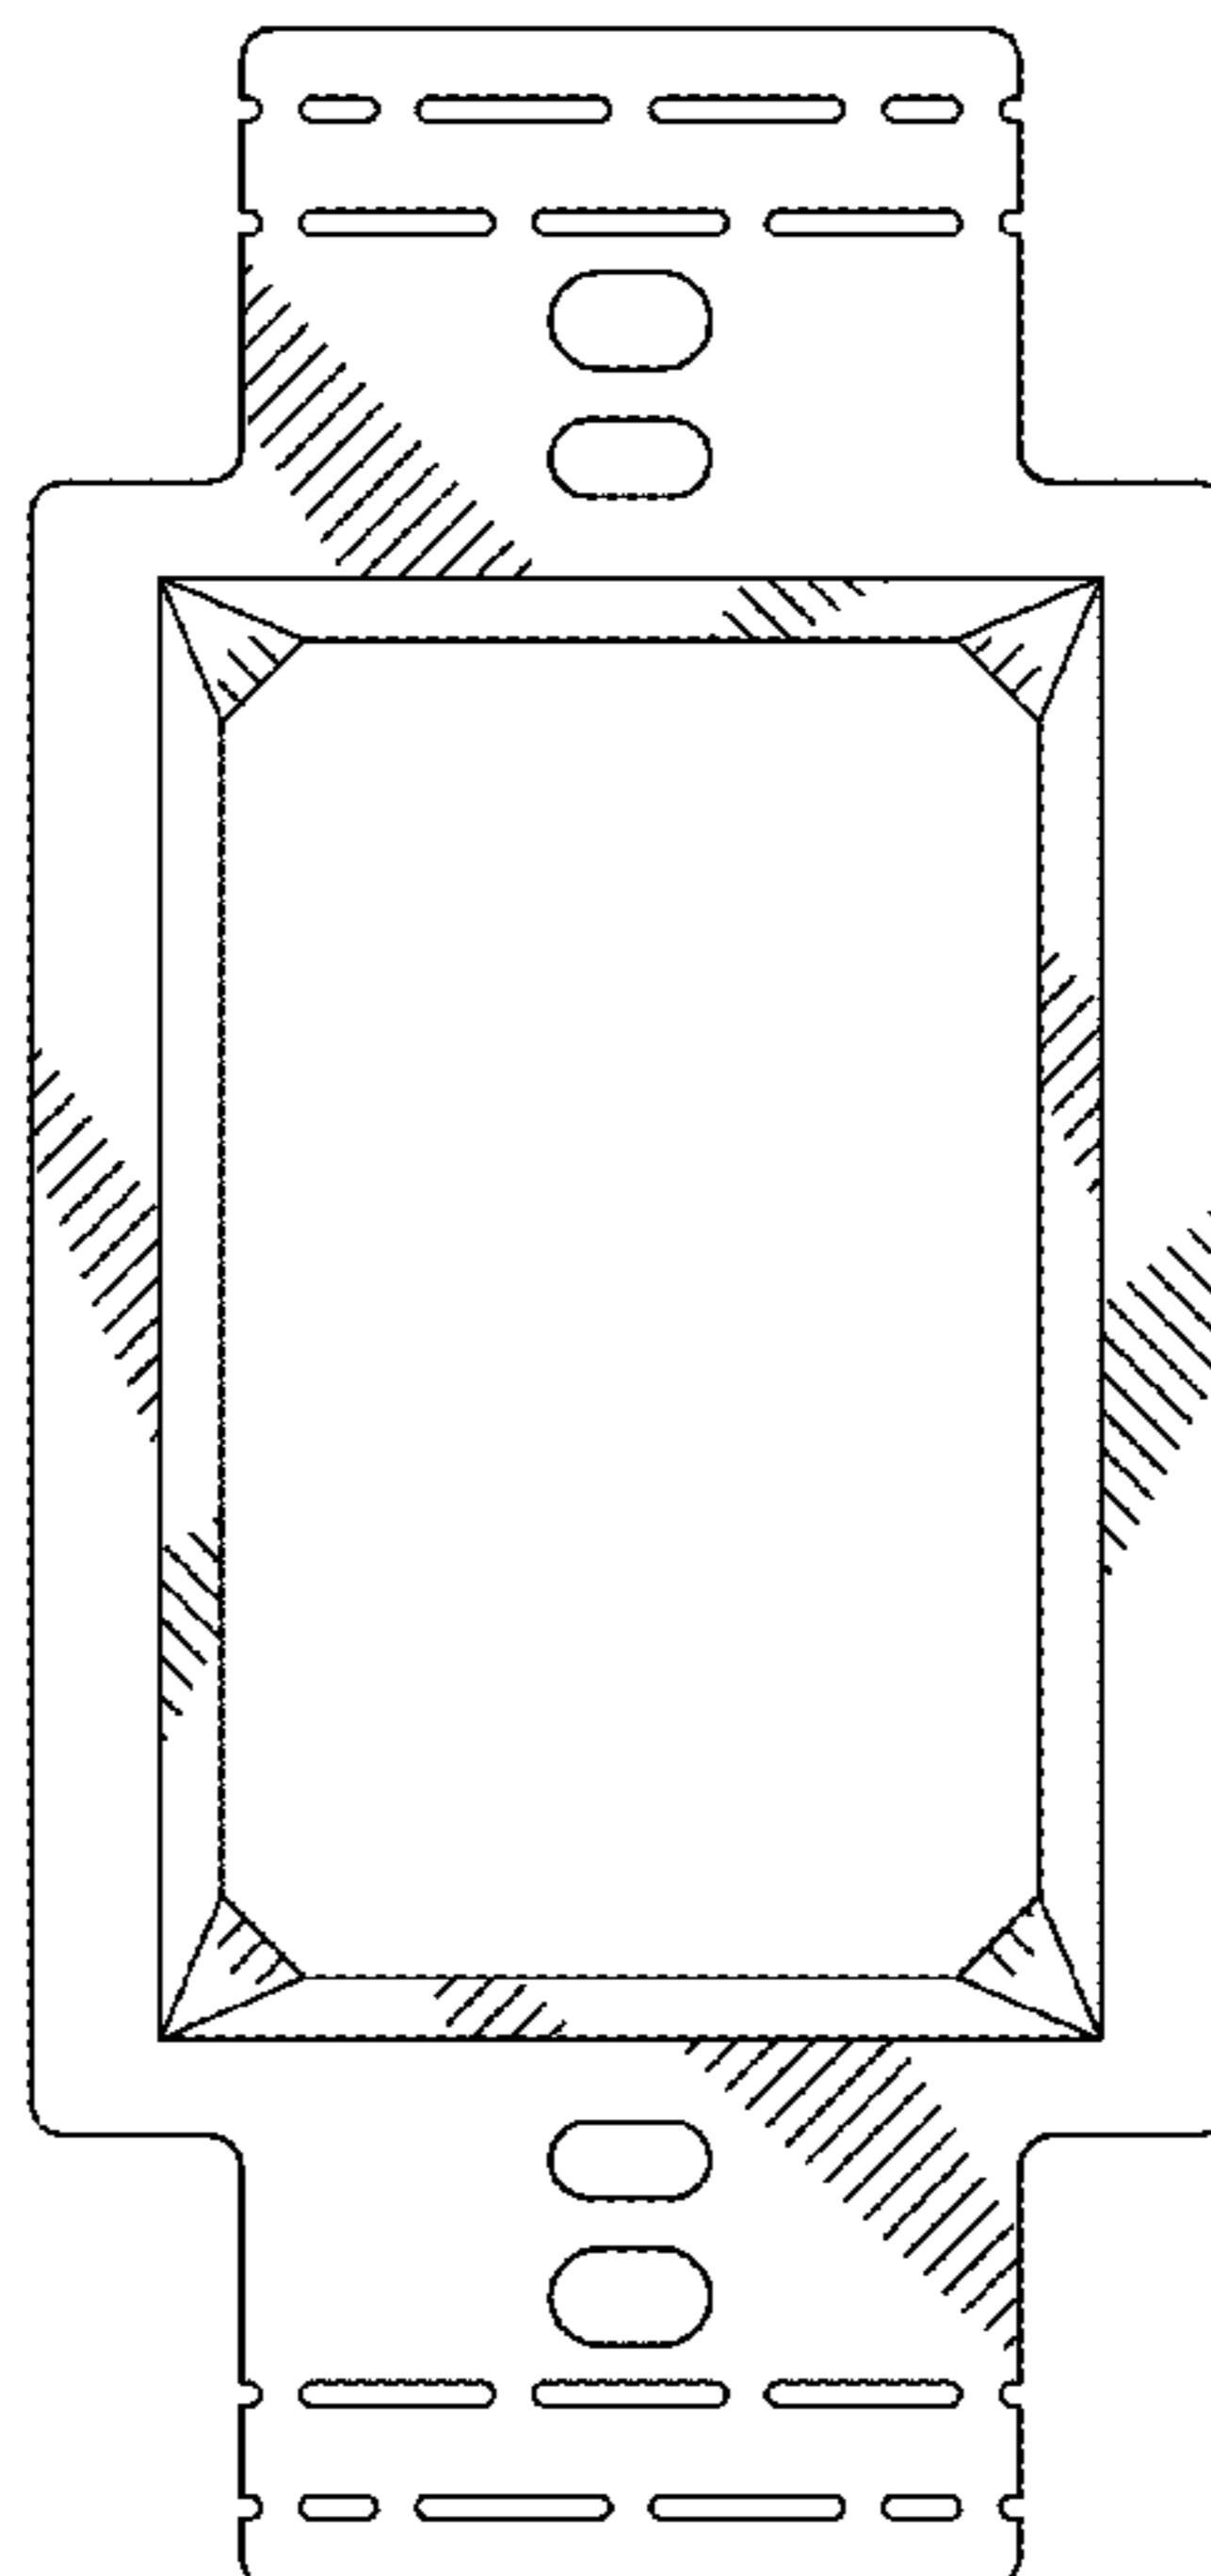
is a front view of an electrical box extender with breakaway flange showing my new design;
